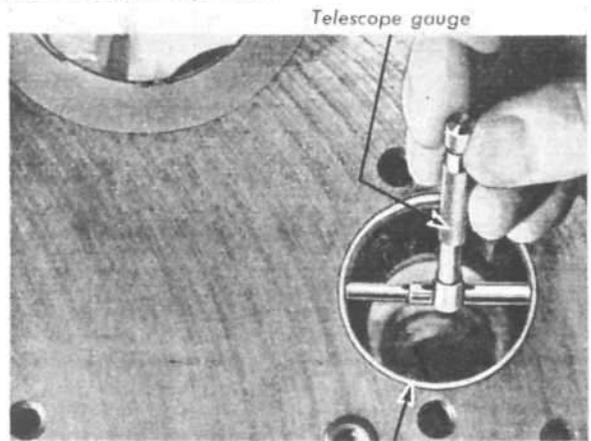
CHECKING CAMSHAFT BEARING INSIDE DIAMETER
